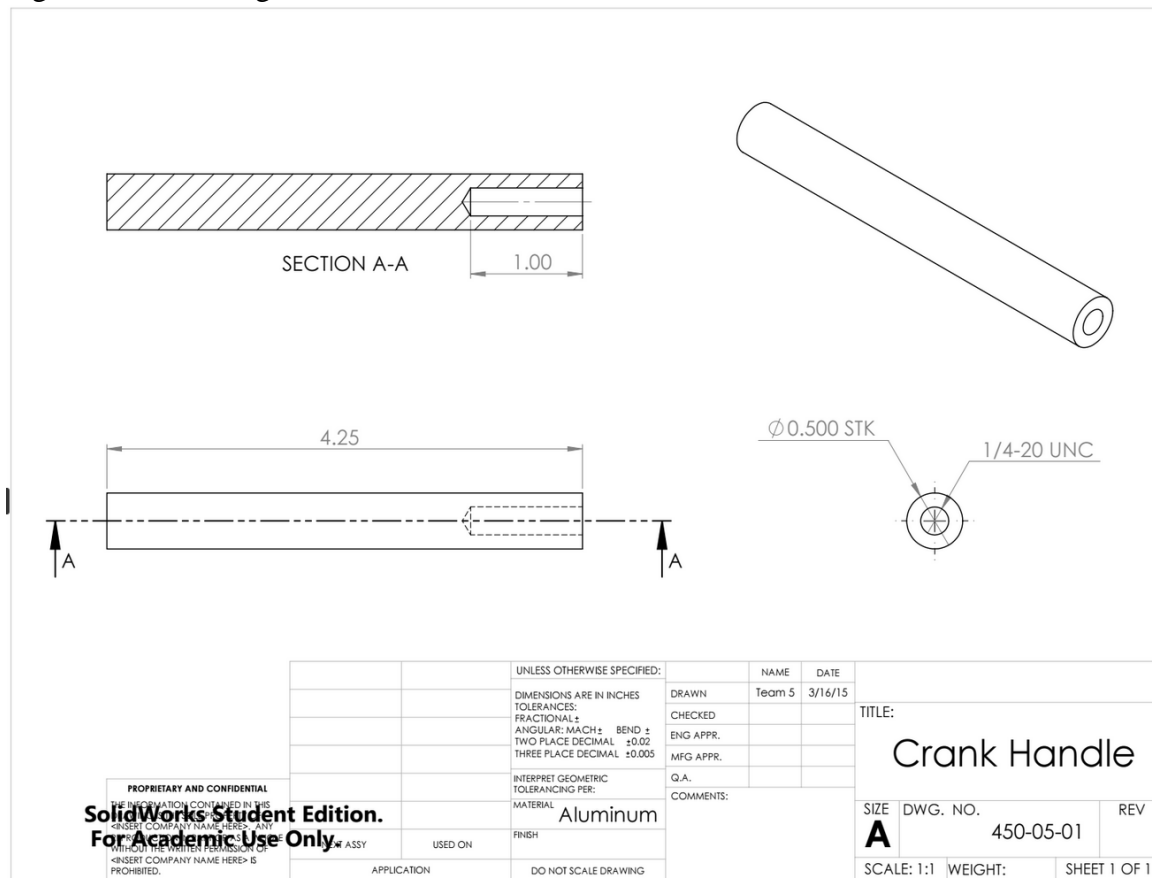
Manufacturing plan for Crank Handle Sleeve
